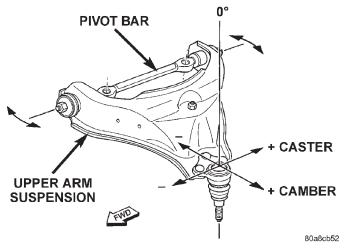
Caster & Camber Adjustment-Typical CASTER
